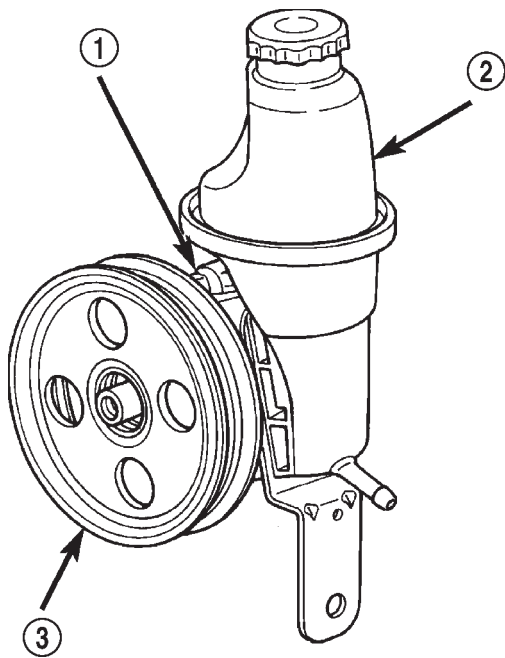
Power Steering Pump - 4.7L 80bfe1e3
